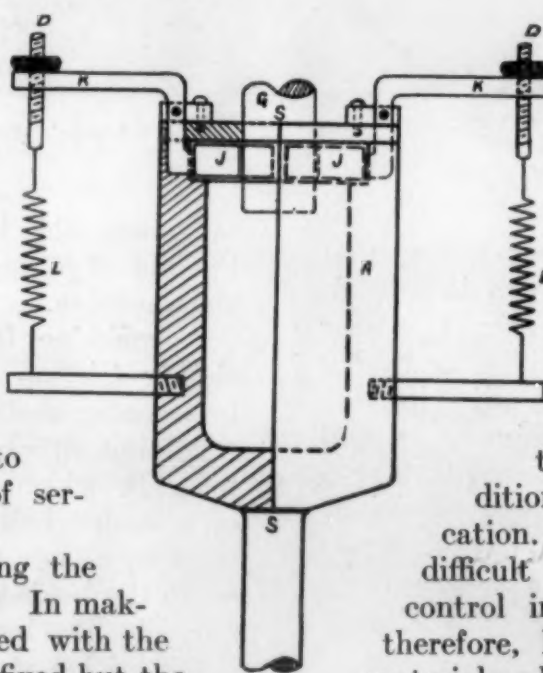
Gage Wear Testing Machine Designed by French and Herschman
